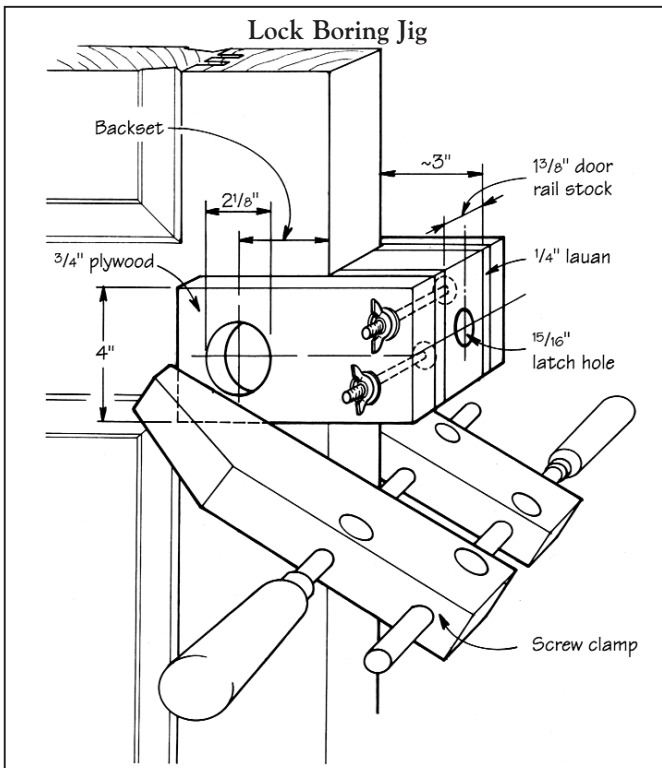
This lock mortising jig, which adjusts to fit interior or exterior door thicknesses, clamps to the latch side of a door with a screw clamp. With the two lauan spacers, the latch hole will be centered in the edge of a 1 3/4-inch door.
